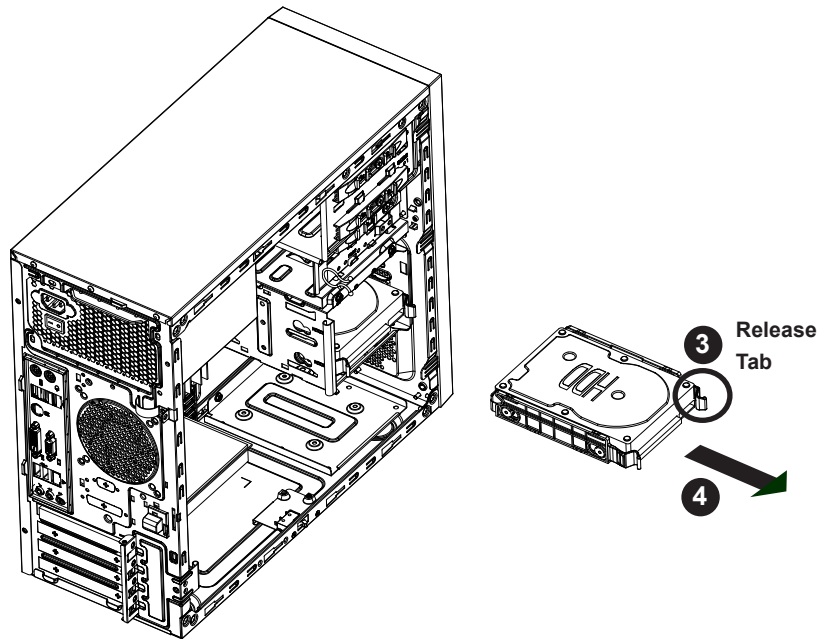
Removing a Hard Drive Carrier from the Chassis
